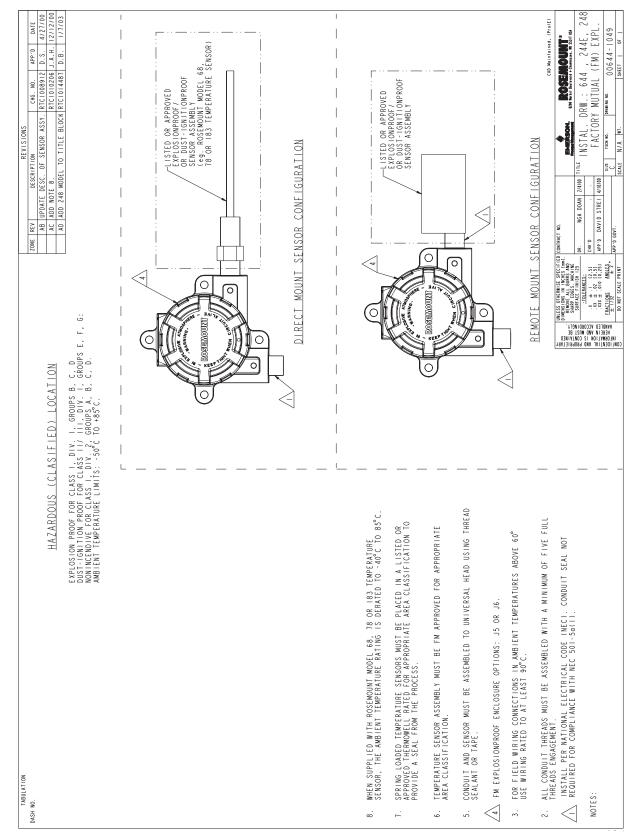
FM Explosion-Proof Installation Drawing 00644-1049, Rev. AD
